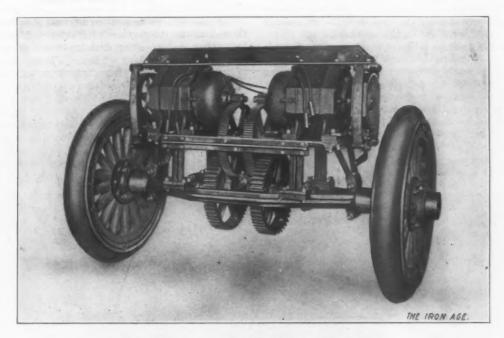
Rear Axle from Above, Showing Motors and Gearing.
